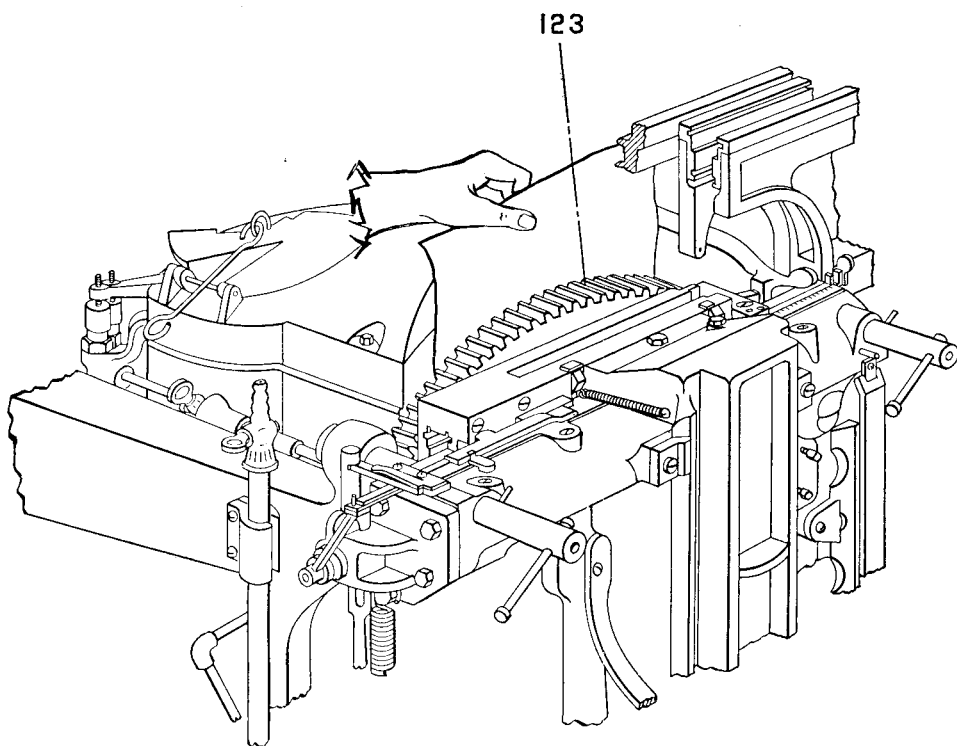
View showing the means of inserting a piece of tissue paper between the mouthpiece and the mold in testing the lock-up.
